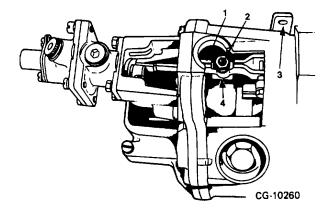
Rack Link and Stop Shackle in Excess Fuel (Starting) Position (Governor Housing Cut Away for Illustration)
